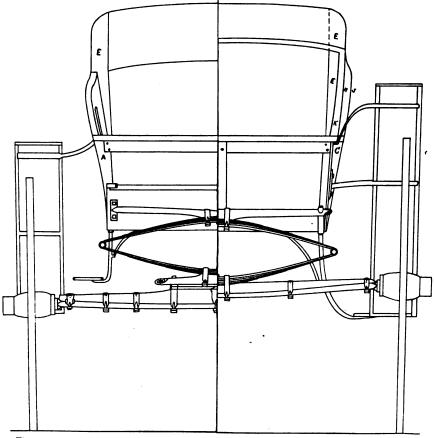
SHOWING HALF FRONT ELEVATION.
